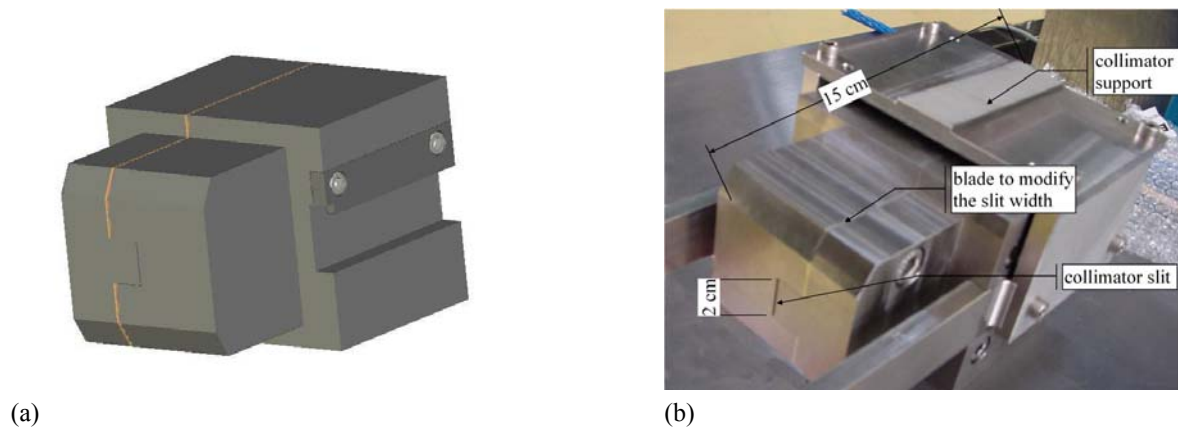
The tungsten collimator with adjustable slit width. (a) 3D drawing of the collimator. (b) A view of it before the assembly of the station.
